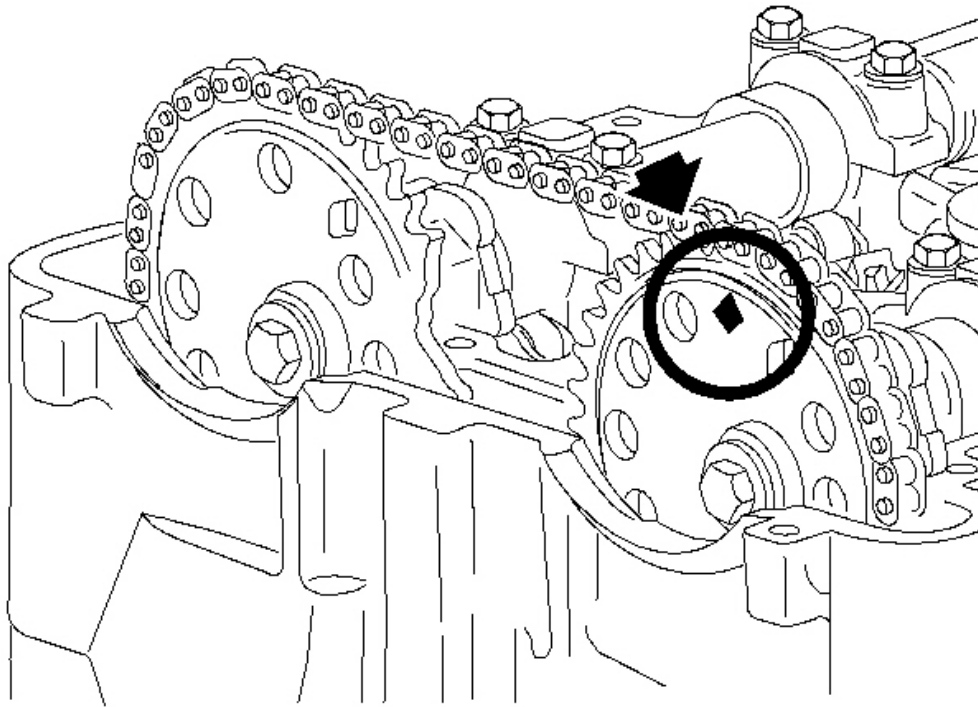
Rotating Camshaft Using 24 mm Open-End Wrench
